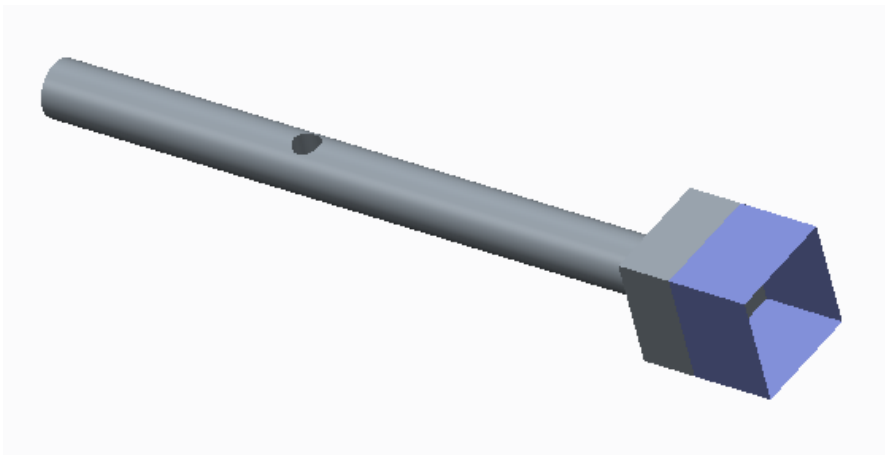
A CAD drawing of the puncher that will be used in design concept #1
